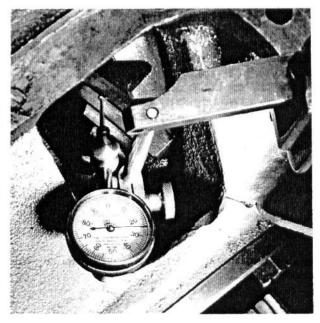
Ring Gear and Pinion Backlash Measurement Setup
